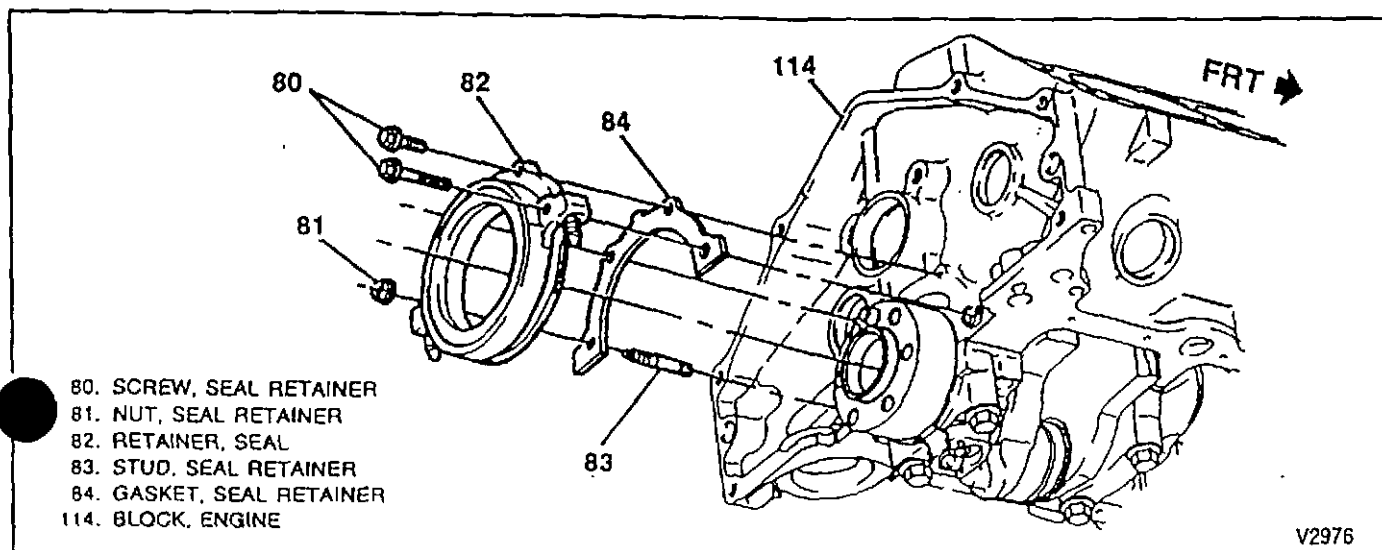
Crankshaft Rear Oil Seal Retainer (5.0L and 5.7L Engines)
